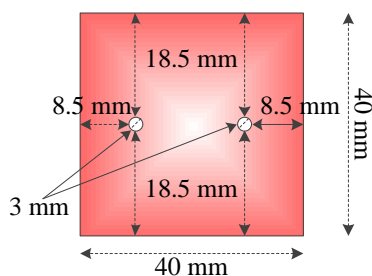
Top view of the aluminium heater block and the position of the two hot side thermocouples.
